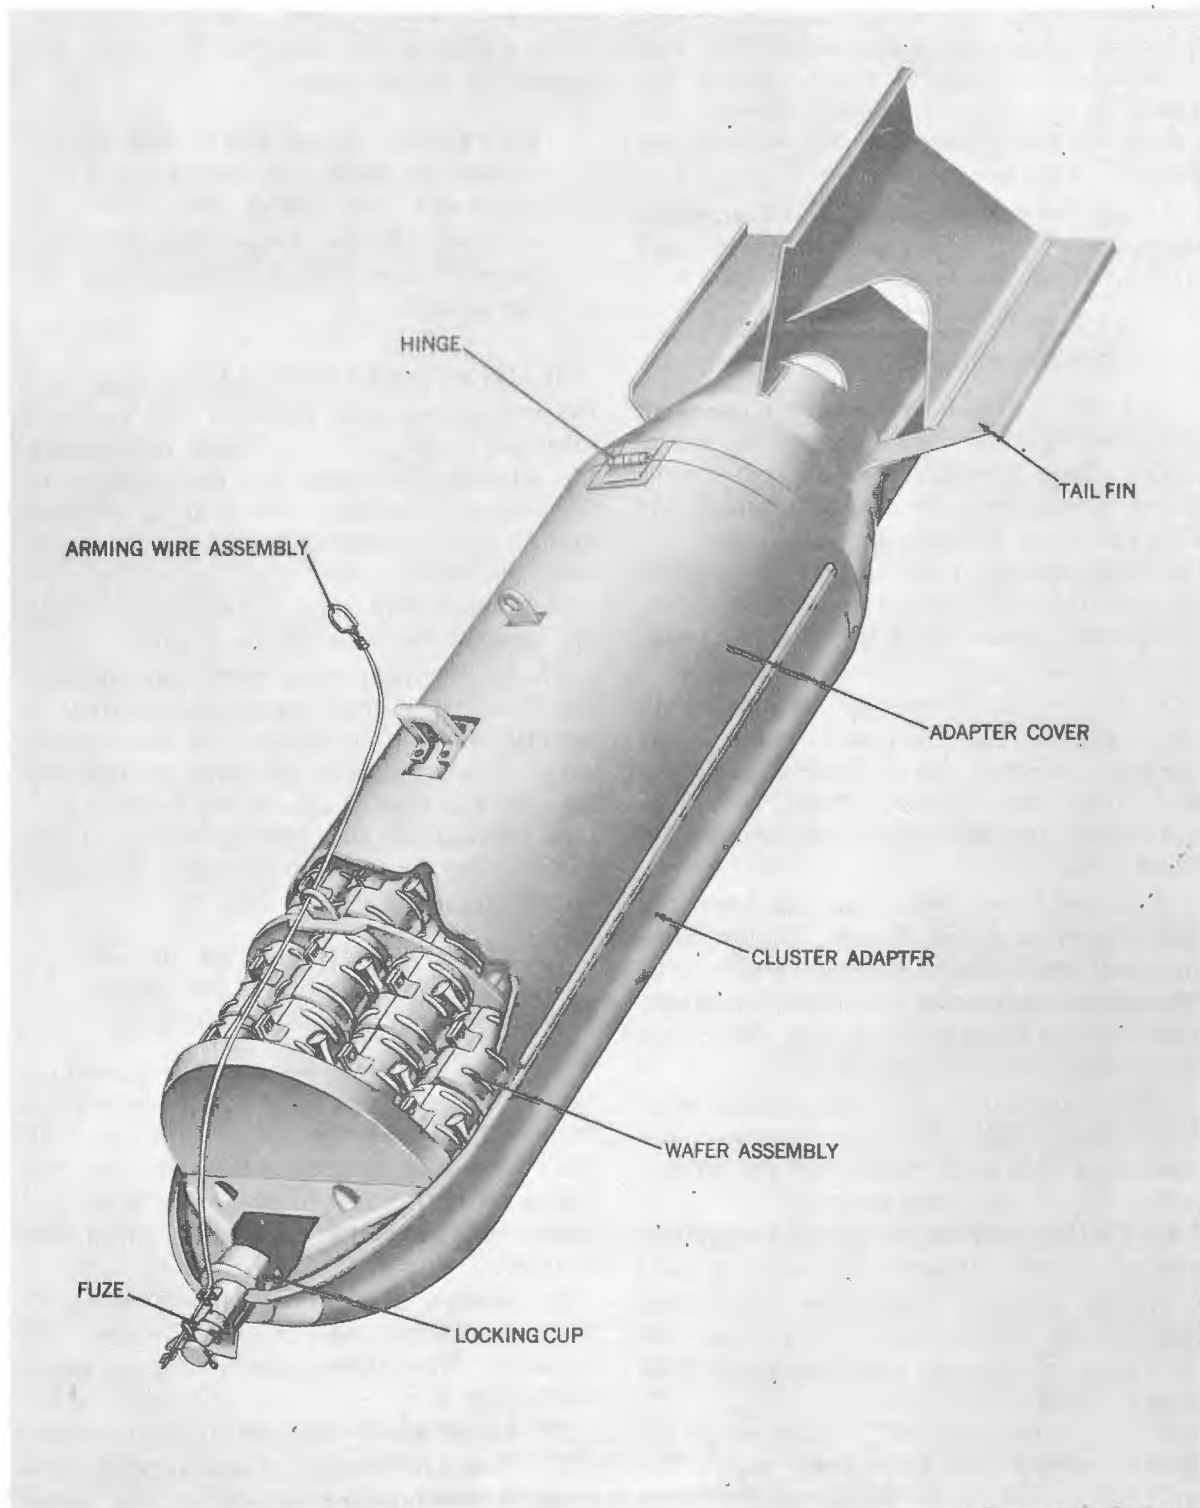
500-lb Frag Bomb Cluster M29A1, Cutaway View.
